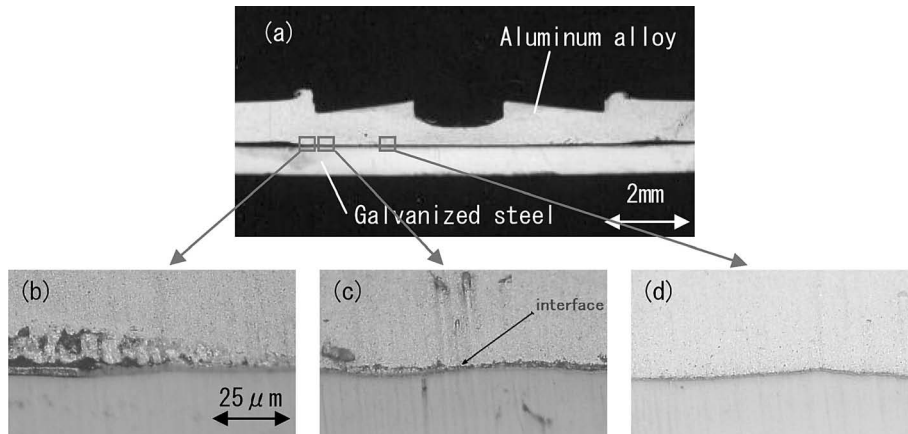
Cross-section of SFW joint: (a) is a whole image, (b), (c), (d) are close section view of interface.
